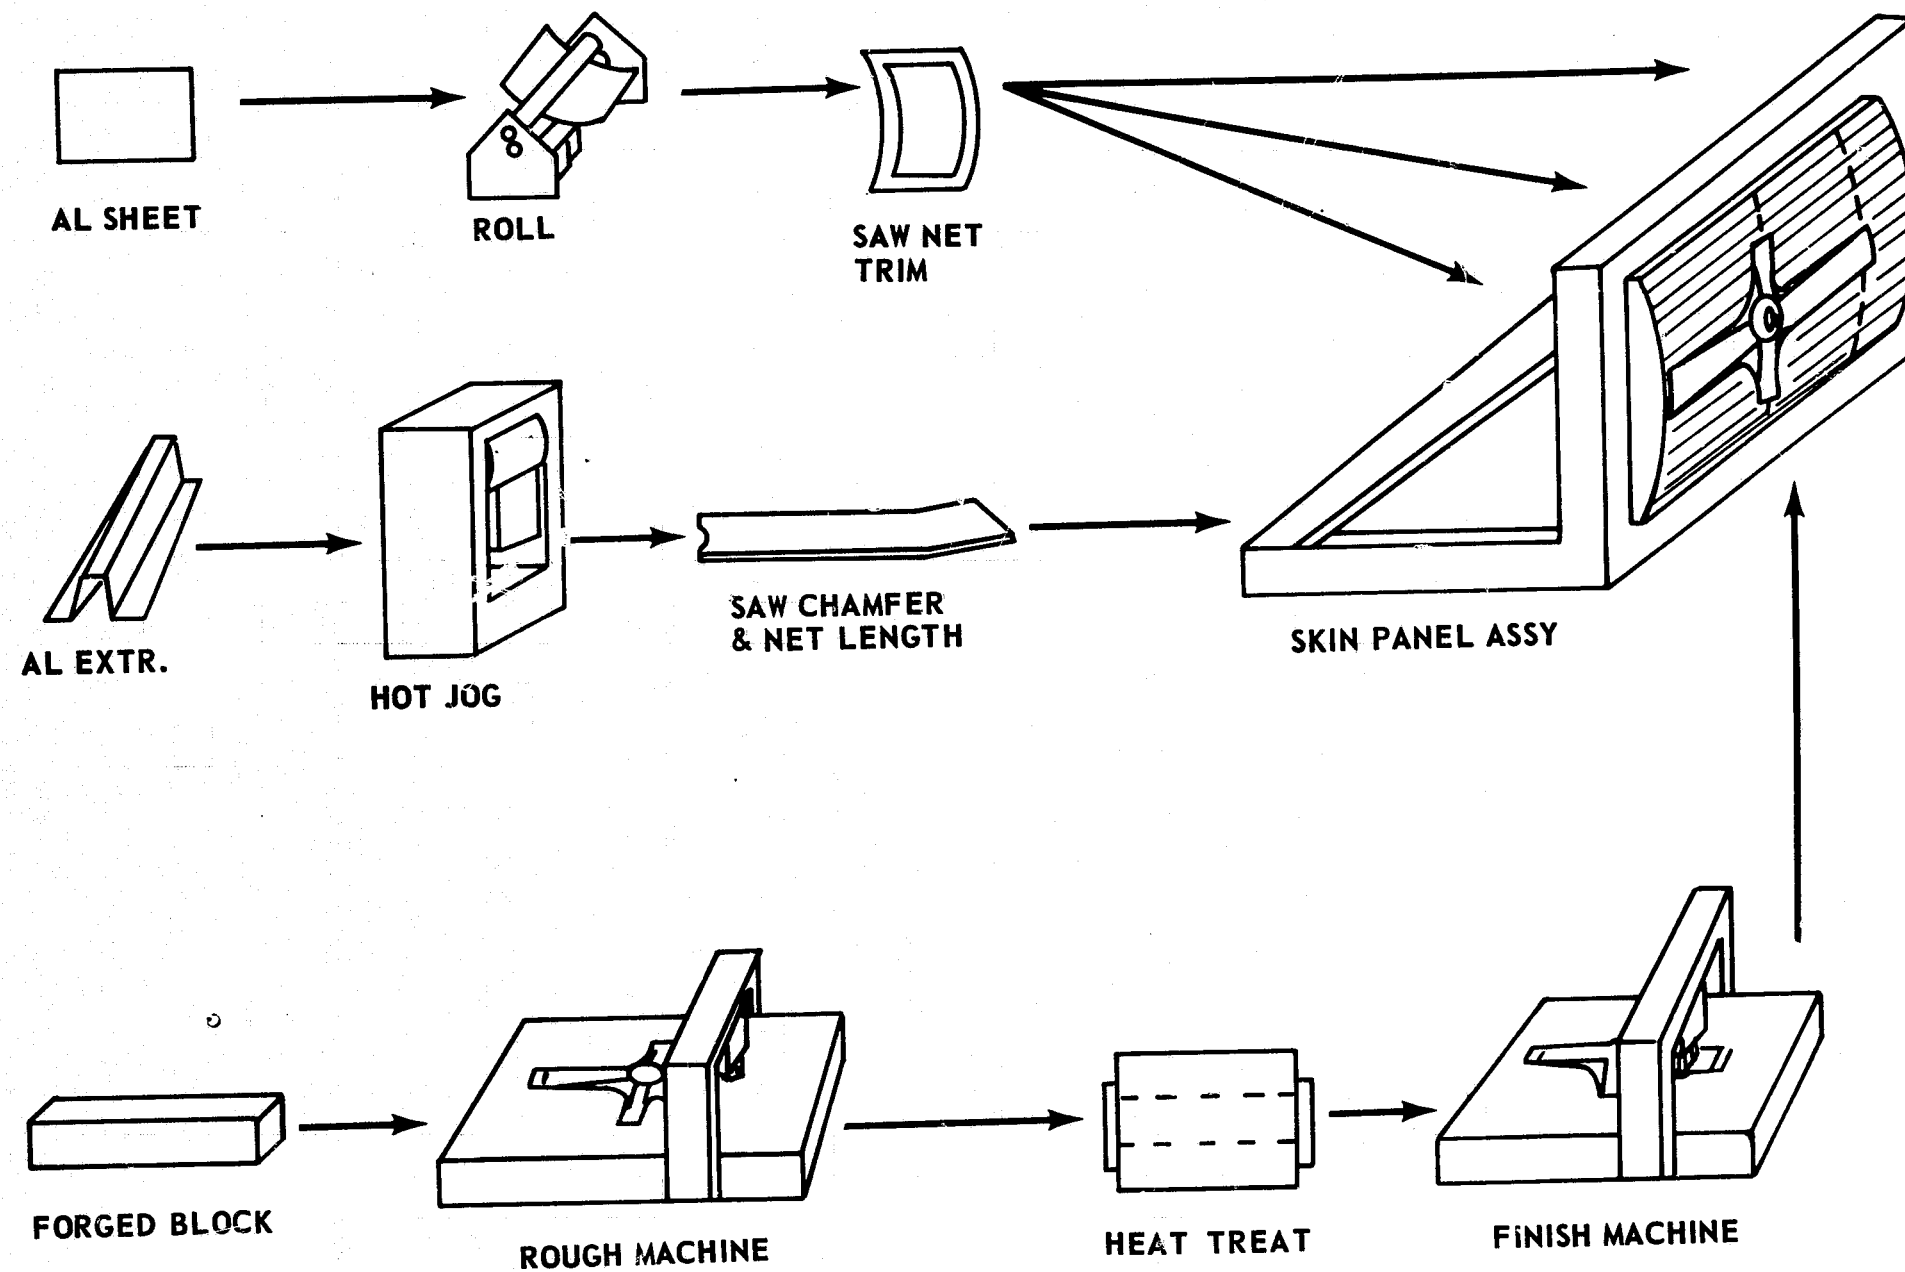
SKIN PANEL ASSEMBLY SEQUENCE
